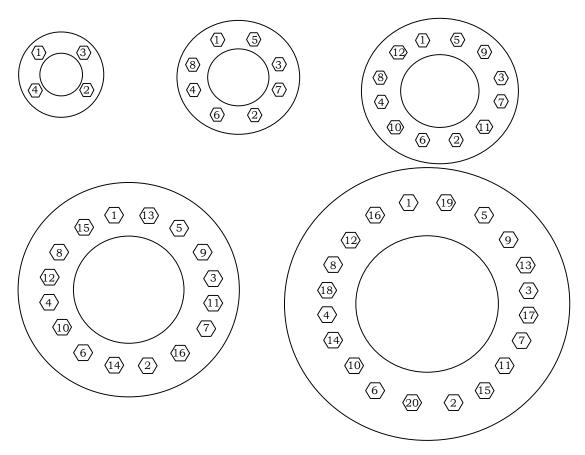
FLANGE BOLT TIGHTENING SEQUENCE
